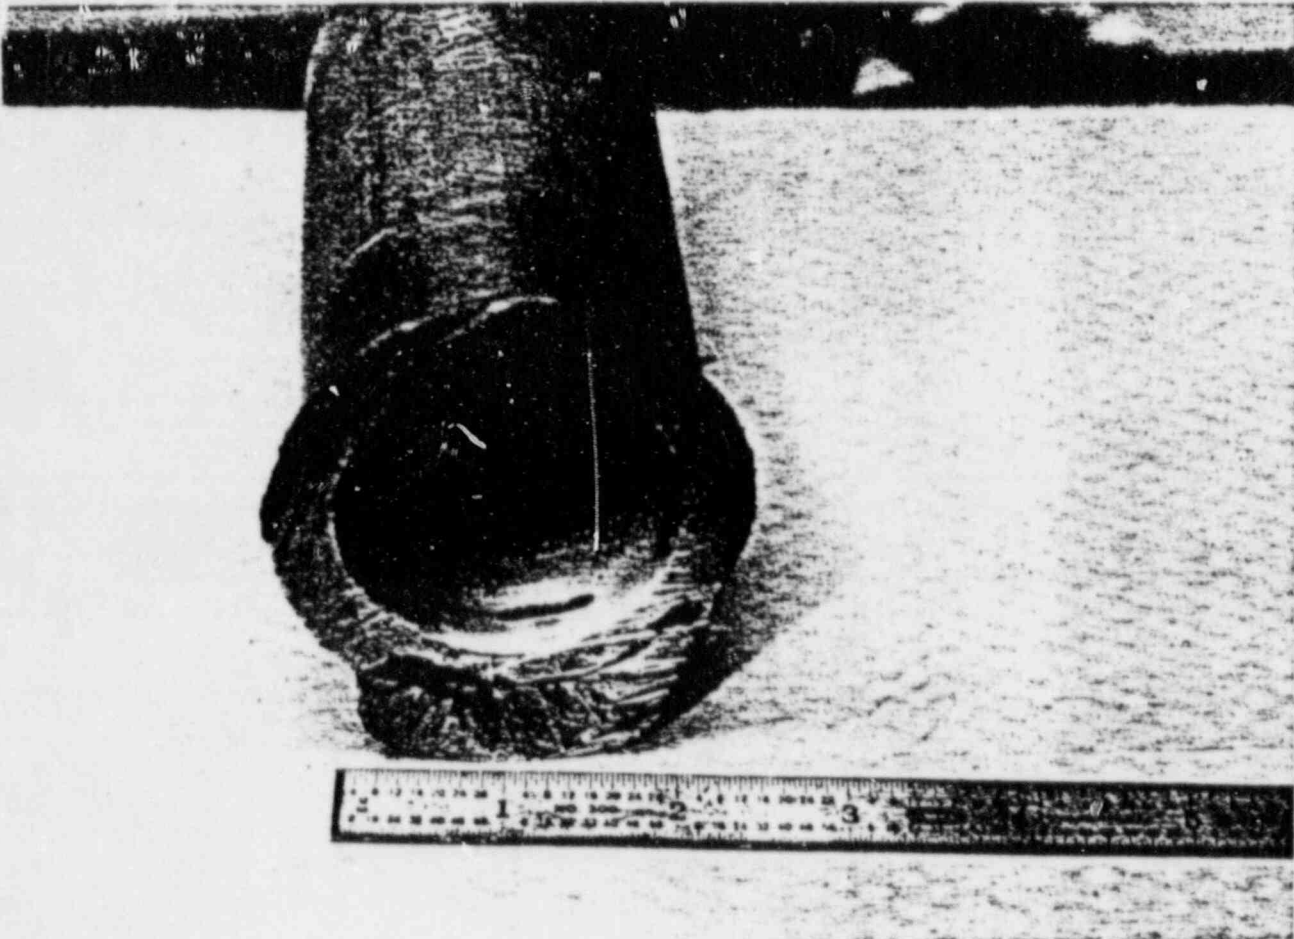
Liquid penetrant indication at ID surface. The longer indication is due to the gap between the pipe and the socket beyond the weld and is not connected to the crack.
